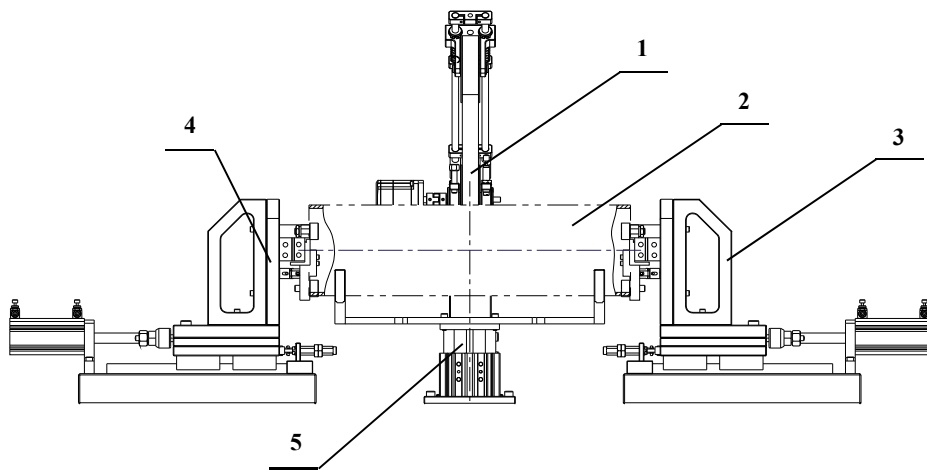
Structure Chart of measuring positioning mechanism. 1 – friction drive mechanism; 2 – tubular parts; 3, 4 – internal support positioning mechanism; 5 – external support positioning mechanism.
